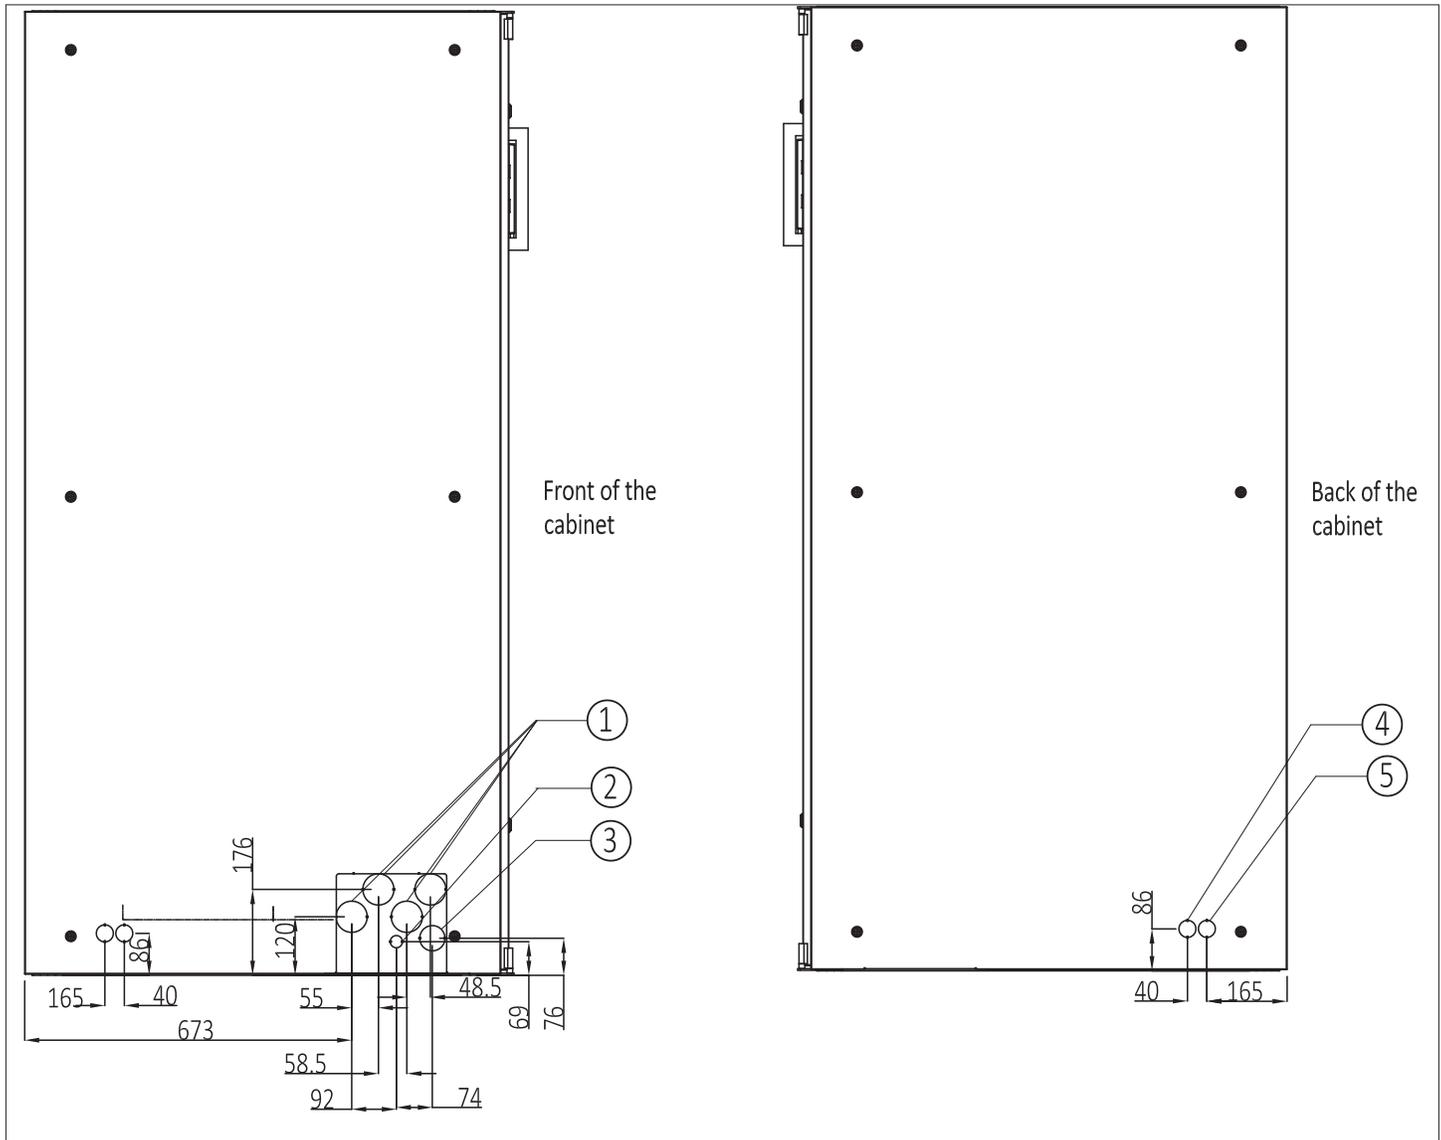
The Position of Pipe Bottom Outlet of Single Cabinet Unit (unit: mm)
